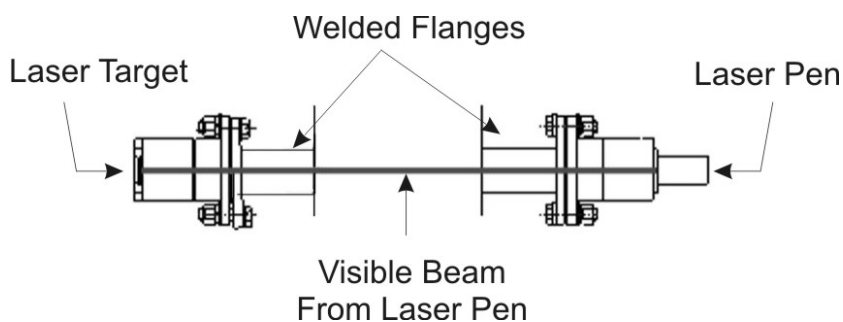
Adjusting the Instrument Flanges with Laser Pen and Target.
